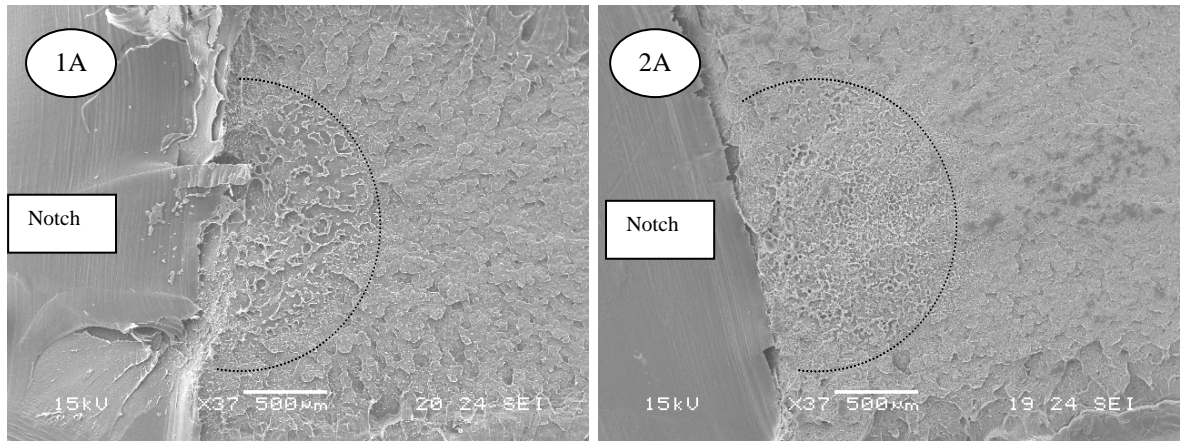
Schematic of the fracture surface after Charpy impact test
